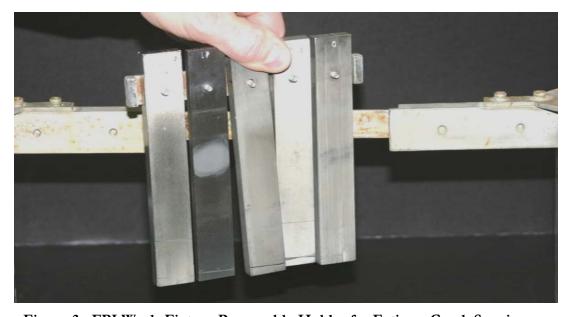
FPI Wash-Fixture Removable Holder for Fatigue-Crack Specimens
